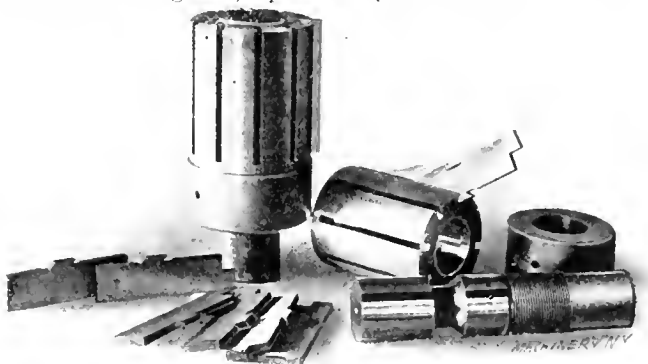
Special Arbor or Fixture for Sharpening and Grinding Relief on the Blades.
